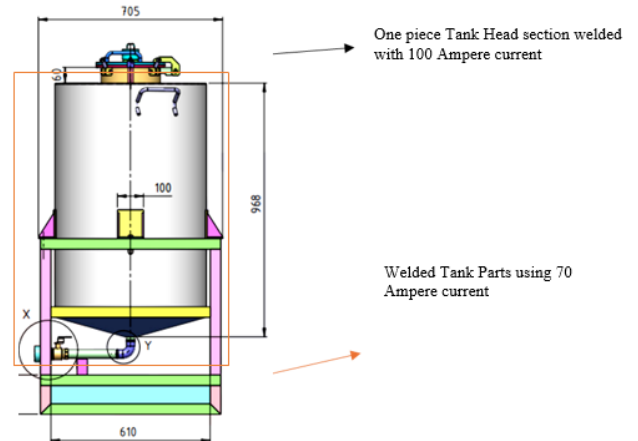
Parts Welded With 100 Ampere And 70 Ampere Current
